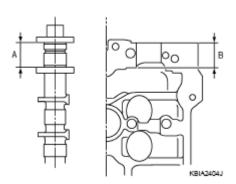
Identifying Measuring Dimensions Of Camshaft And Cylinder Head No. 1 Journel Bearings
